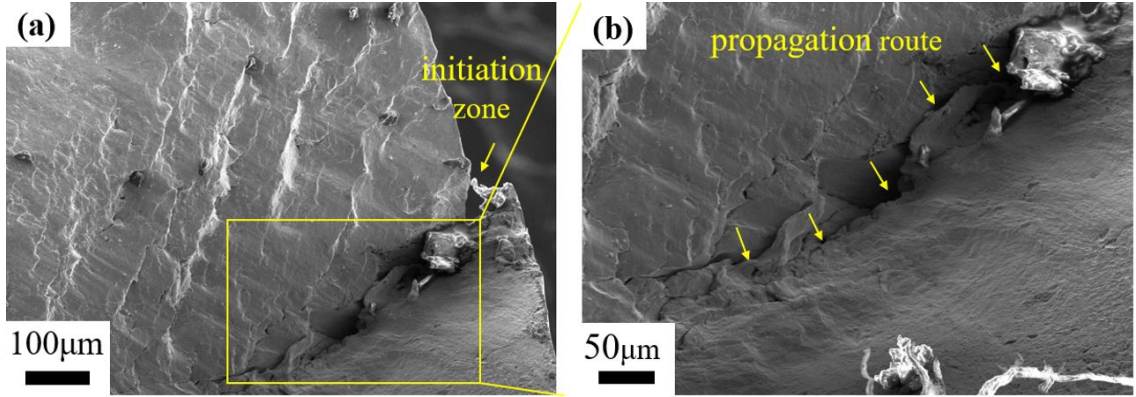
The fatigue fracture surface of unburnished DSS sample broken in 36.832 cycles, at 95% of σ_{yield} (a) crack initiation zone, (b) crack propagation.
